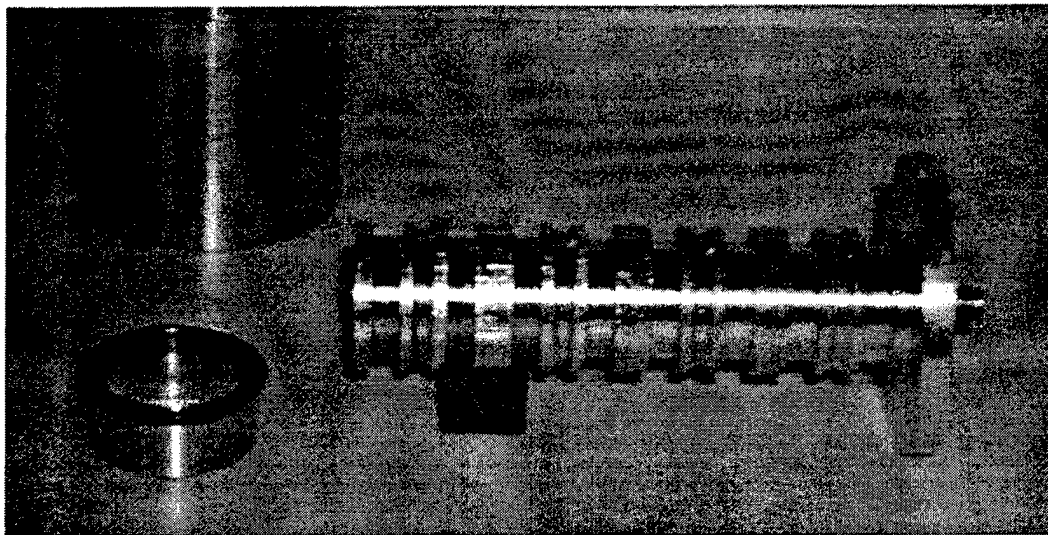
Assembly Tool for Mounting O-Rings in Aging Fixture
